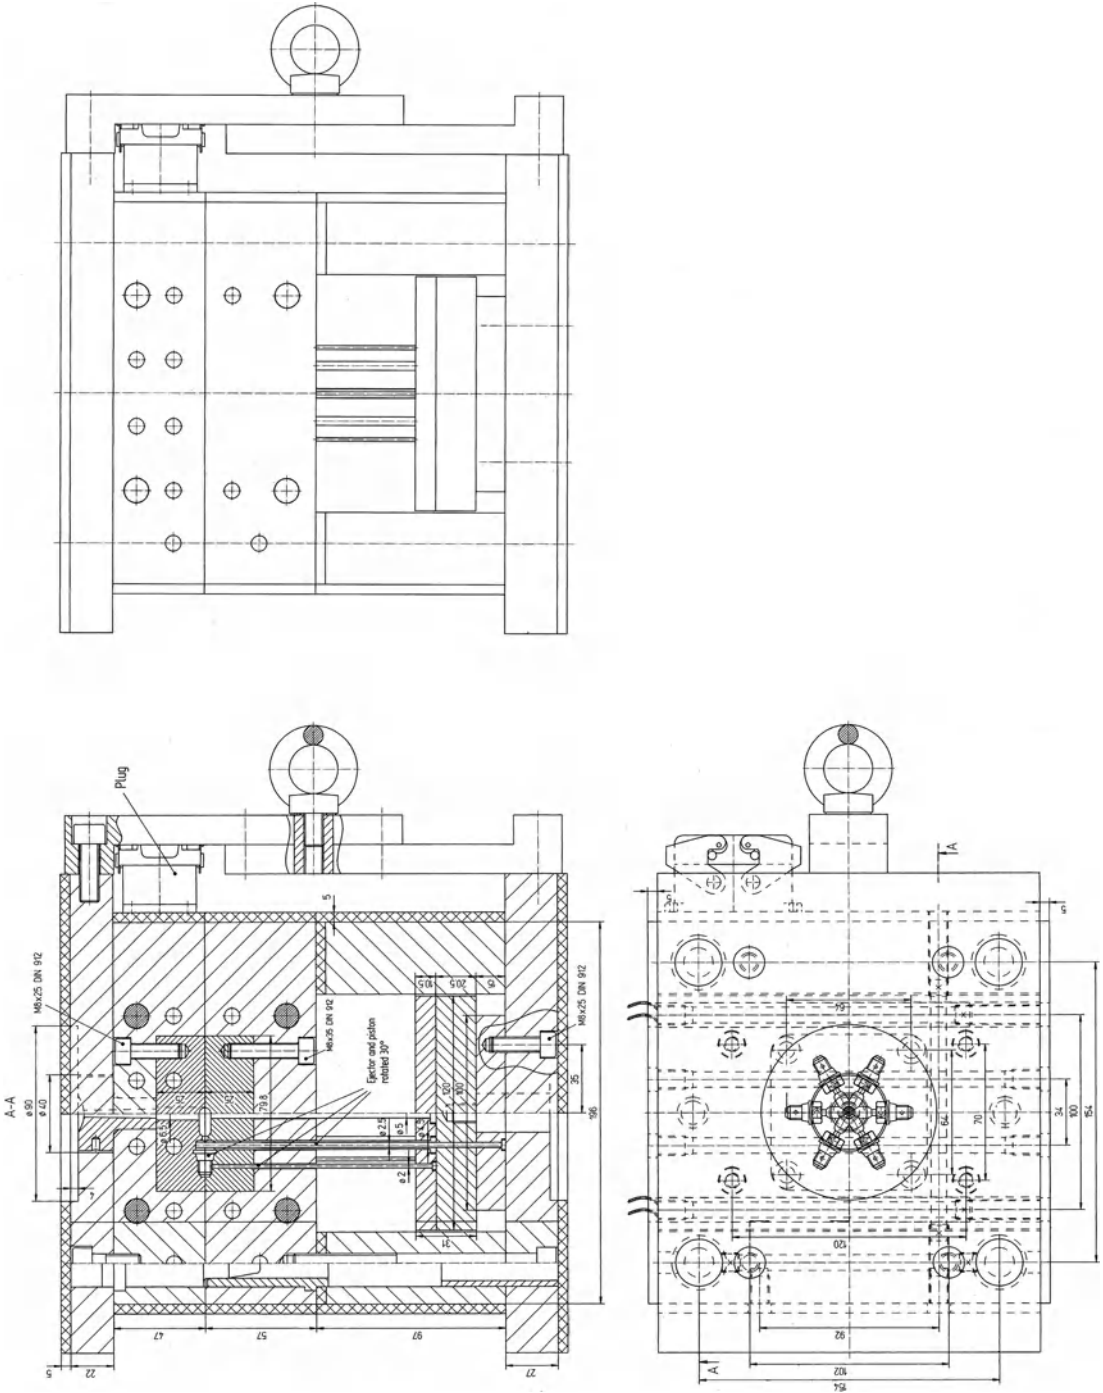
Six-cavity metal-powder injection mold (MIM) for transport fastener
